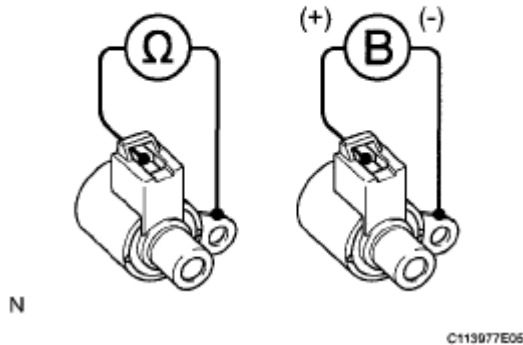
Measuring Resistance Between Shift Solenoid Valve SR Terminals And Solenoid Body
